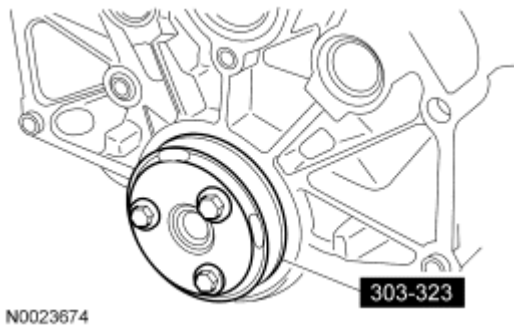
Installing Crankshaft Rear Seal Using Special Tools (303-323)
